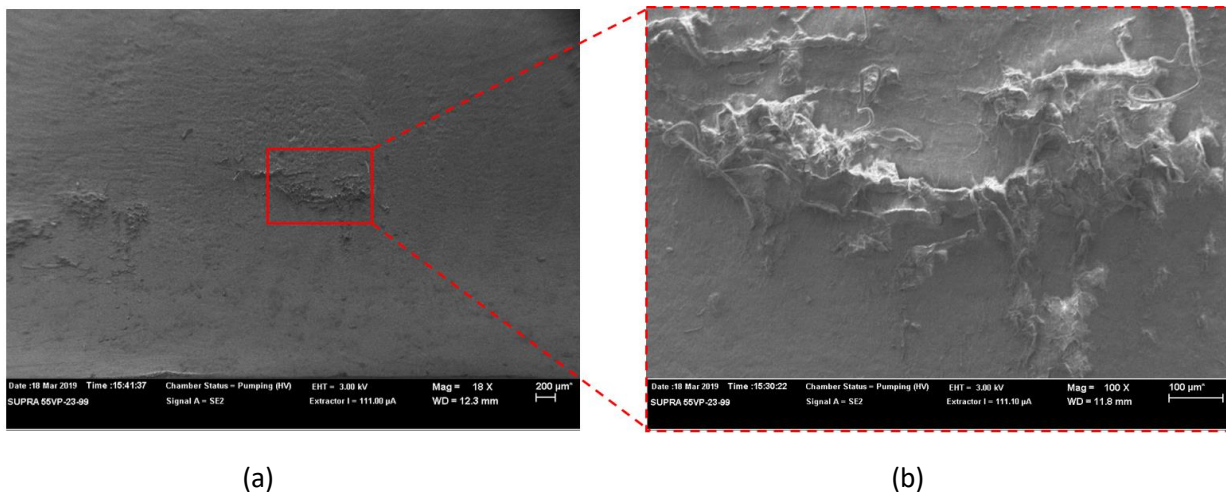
(a) Nylon 66 injection mould gear ($\times 18$). (b) Gear surface wear debris of Nylon 66 injection mould gear ($\times 100$)
